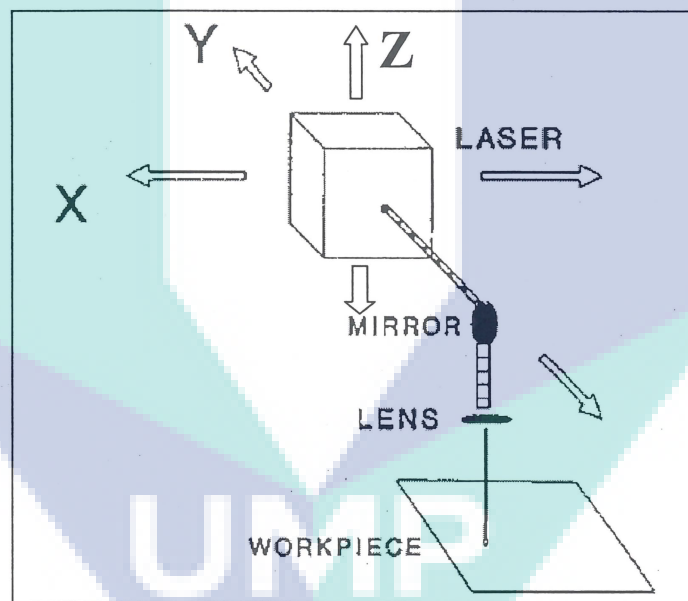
Schematic illustration of laser moving type for cutting and engraving
